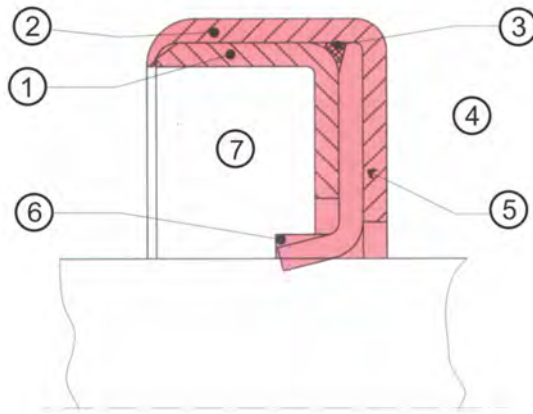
Rotary shaft seal with PTFE sealing lip after installation
